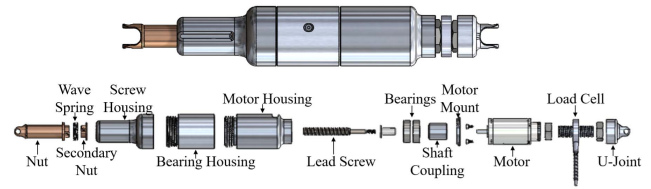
Custom linear actuator design. Non-backdrivable linear actuator design, exploded view shows all components; U-joint attachment, load cell, motor housing, brushed DC motor, motor mount, shaft coupler, bearing housing, angular contact bearings, bearing adapter, ACME lead screw, actuator housing, anti-backlash nut, wave spring, nut.
